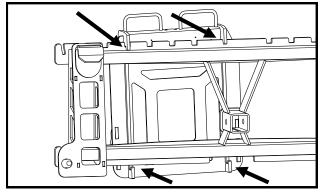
Hang Mounting Frame onto Fork Frame
